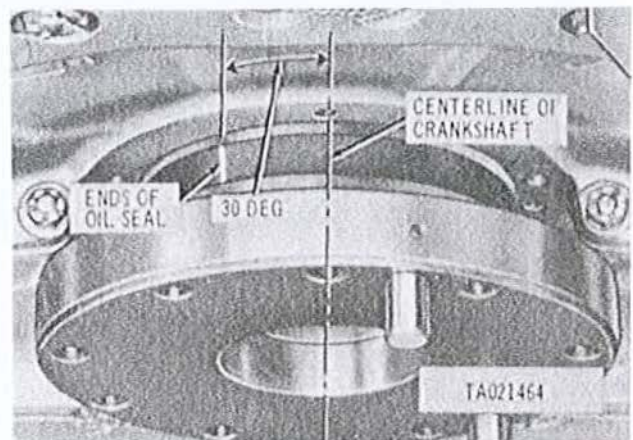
Current position of crankshaft oil seal split line before installing oil seal retainer.
